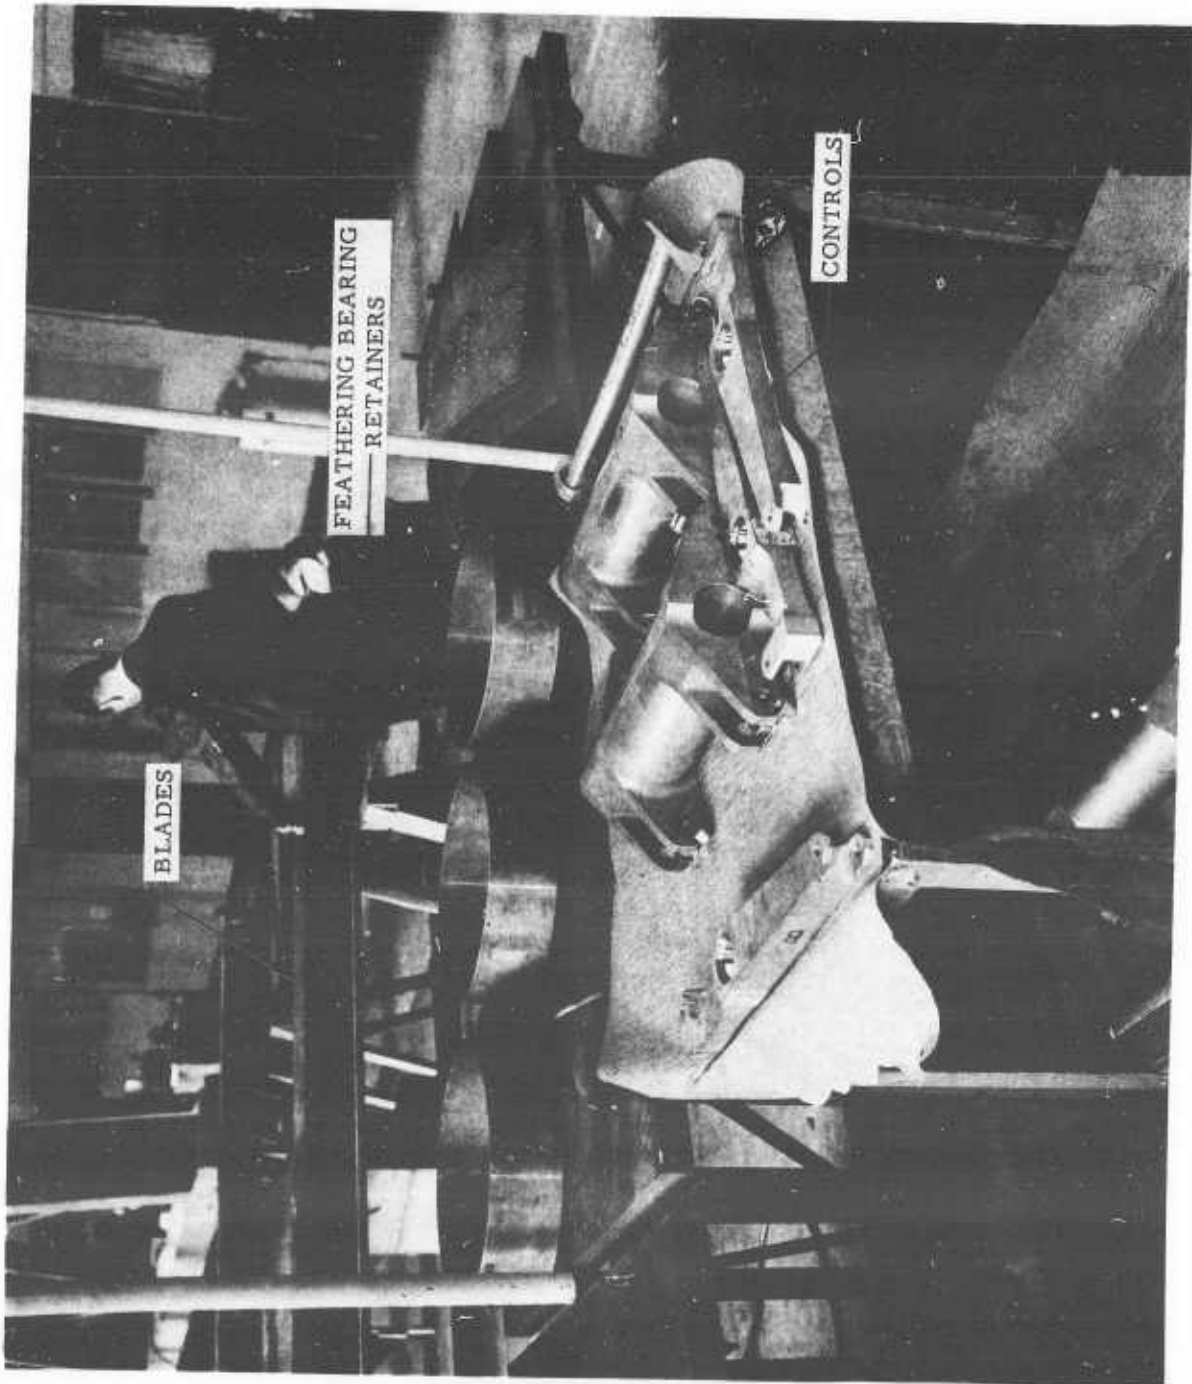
6-2 Rotor Disassembled for 35 Hour Inspection
